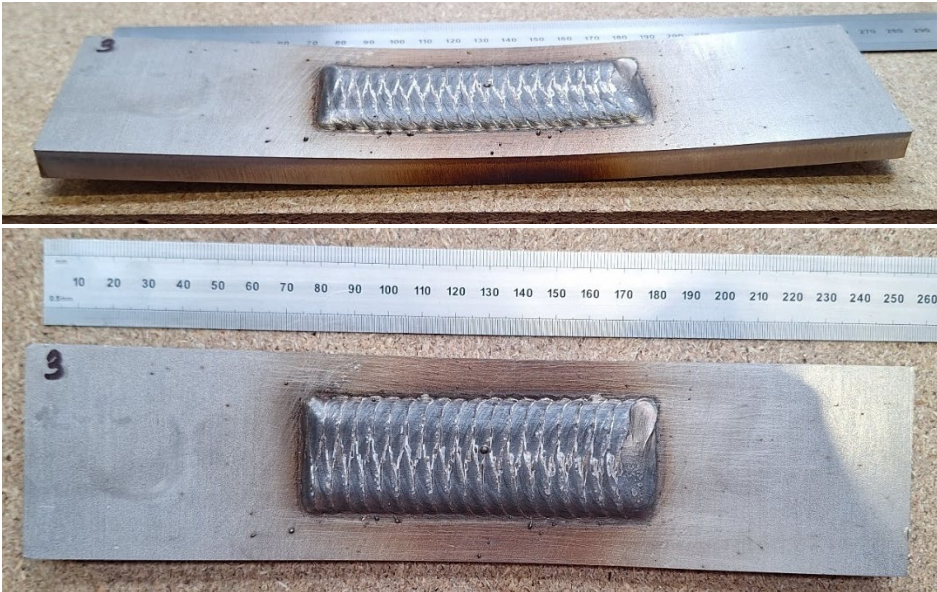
Side (a) and Top (b) views of sample 3 after unclamping
